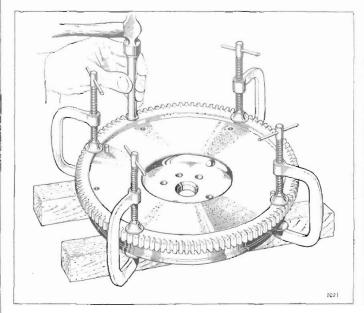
Using clamps to fit a new ring gear to the flywheel
